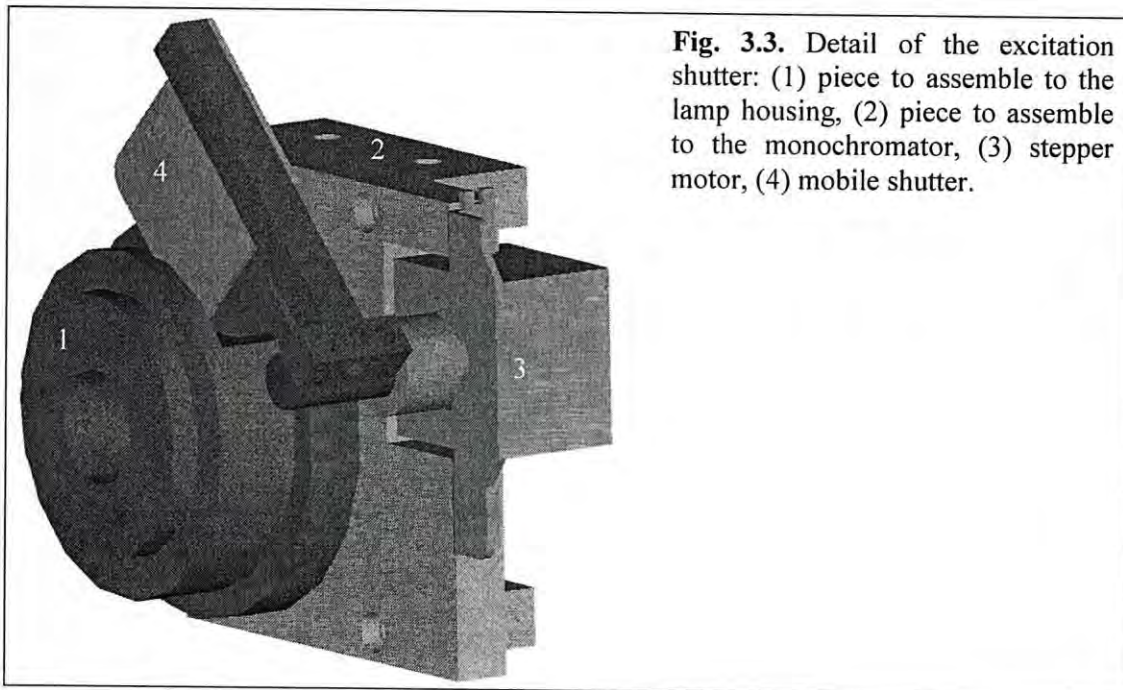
Detail of the excitation shutter: (1) piece to assemble to the lamp housing, (2) piece to assemble to the monochromator, (3) stepper motor, (4) mobile shutter.
